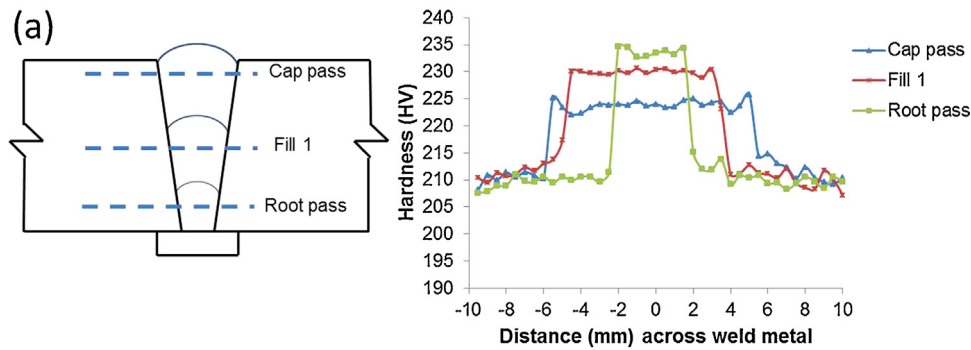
As-welded (a) hardness scan position (b) Hardness profile across the multi-pass welds.
